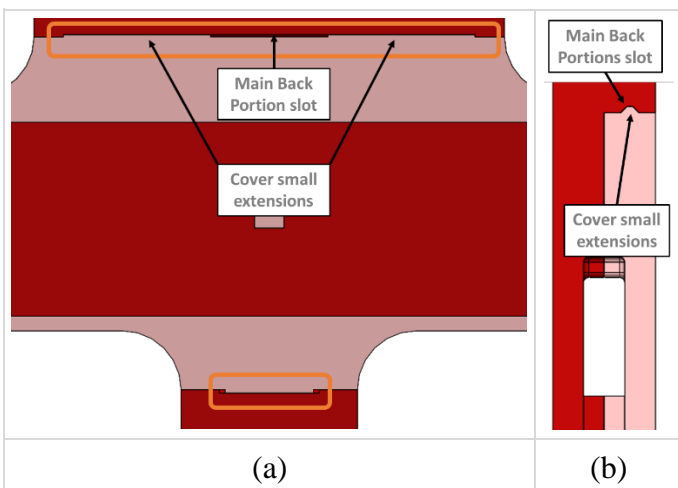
Assembly of the Cover on the Main Back Portion. a – Front Cut View of the assembly; b – Left Cut View of the assembly
